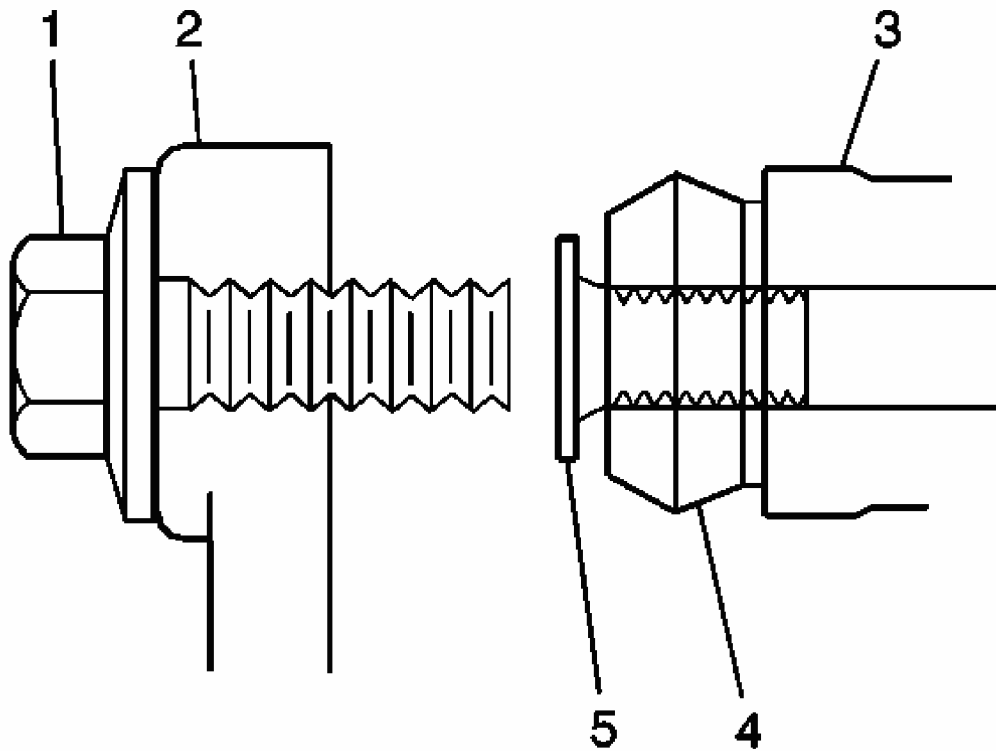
Caliper Mounting Bolt, Bracket, Boot & Slid Pins
